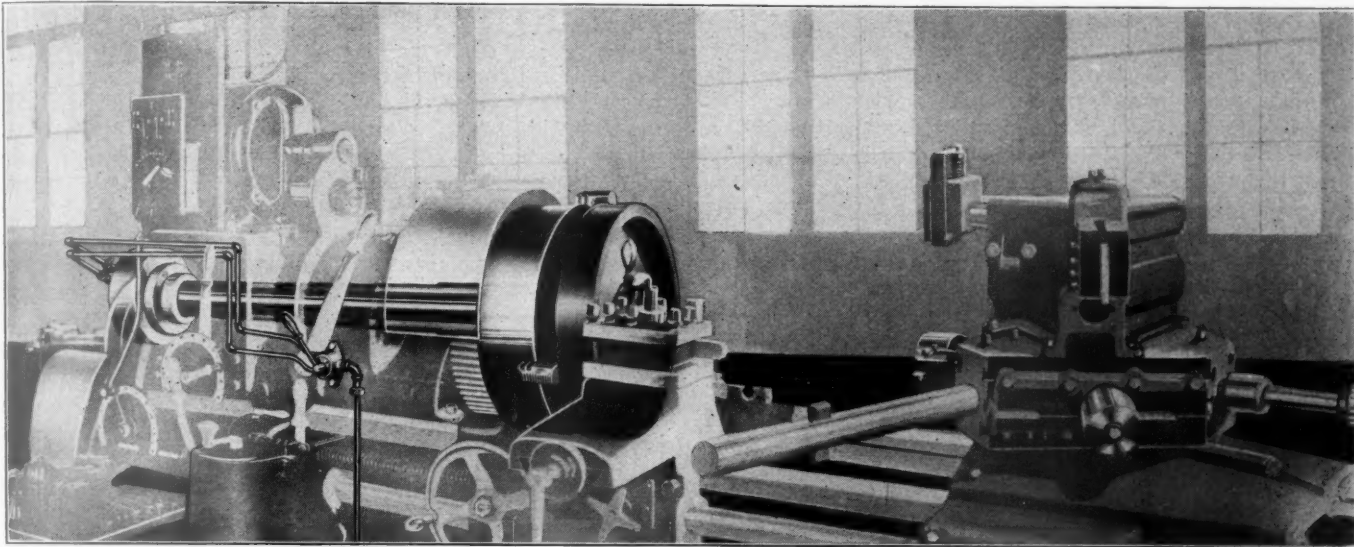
Logan 24-in. Air Operated Chuck Applied to Heavy Duty Turret Lathe
